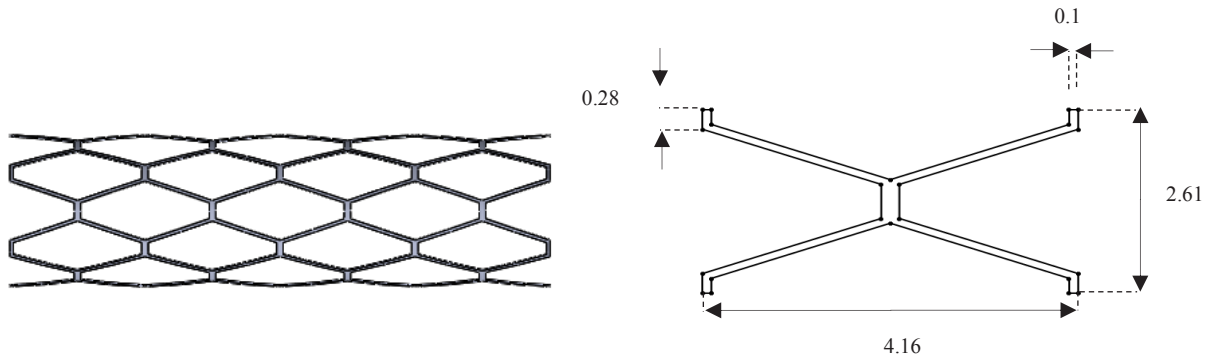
The geometry of the self-expandable stent before compressing (dimensions are in millimeters)
